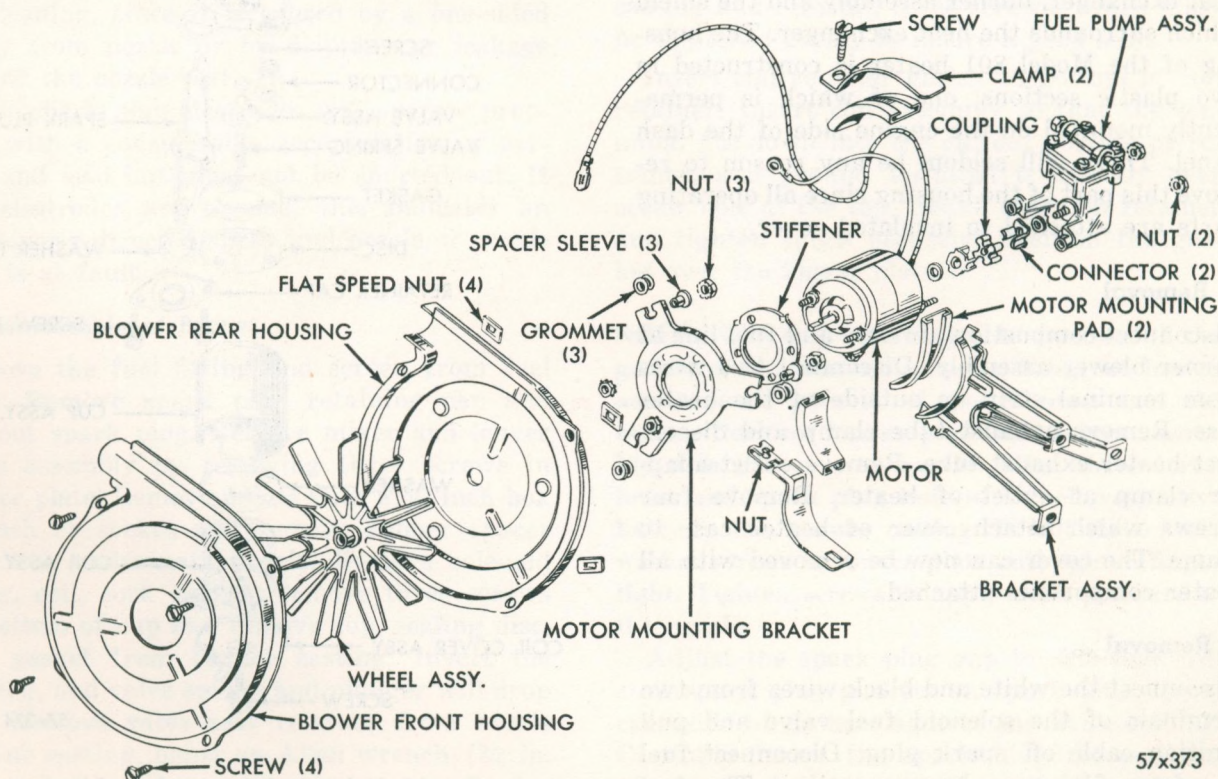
Fuel Pump and Blower Assembly (Disassembled View)
